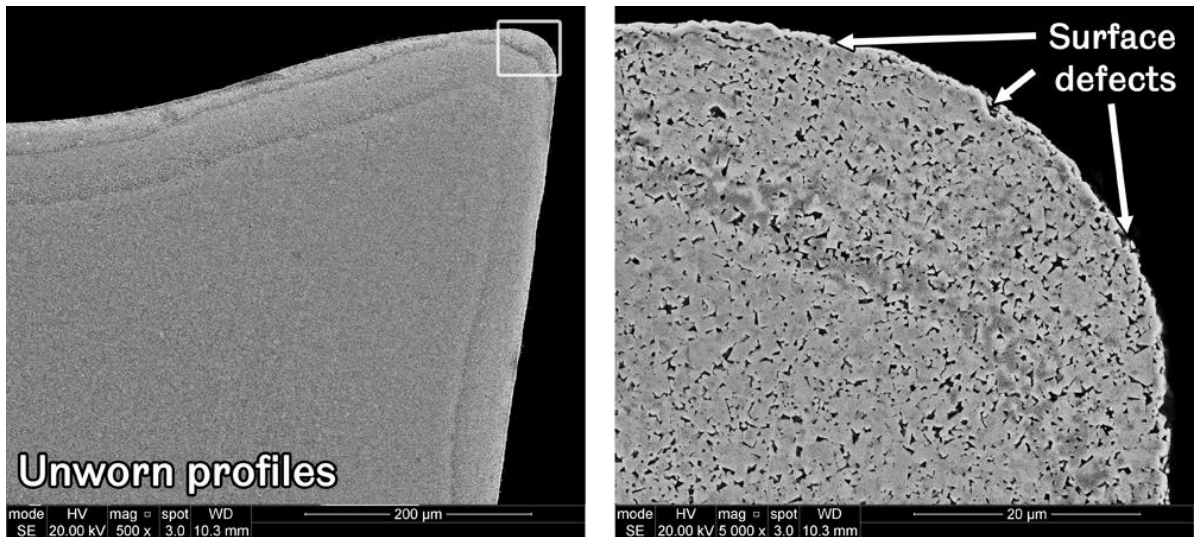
Electron micrographs illustrating unworn cutting edge profile and nose surface.
